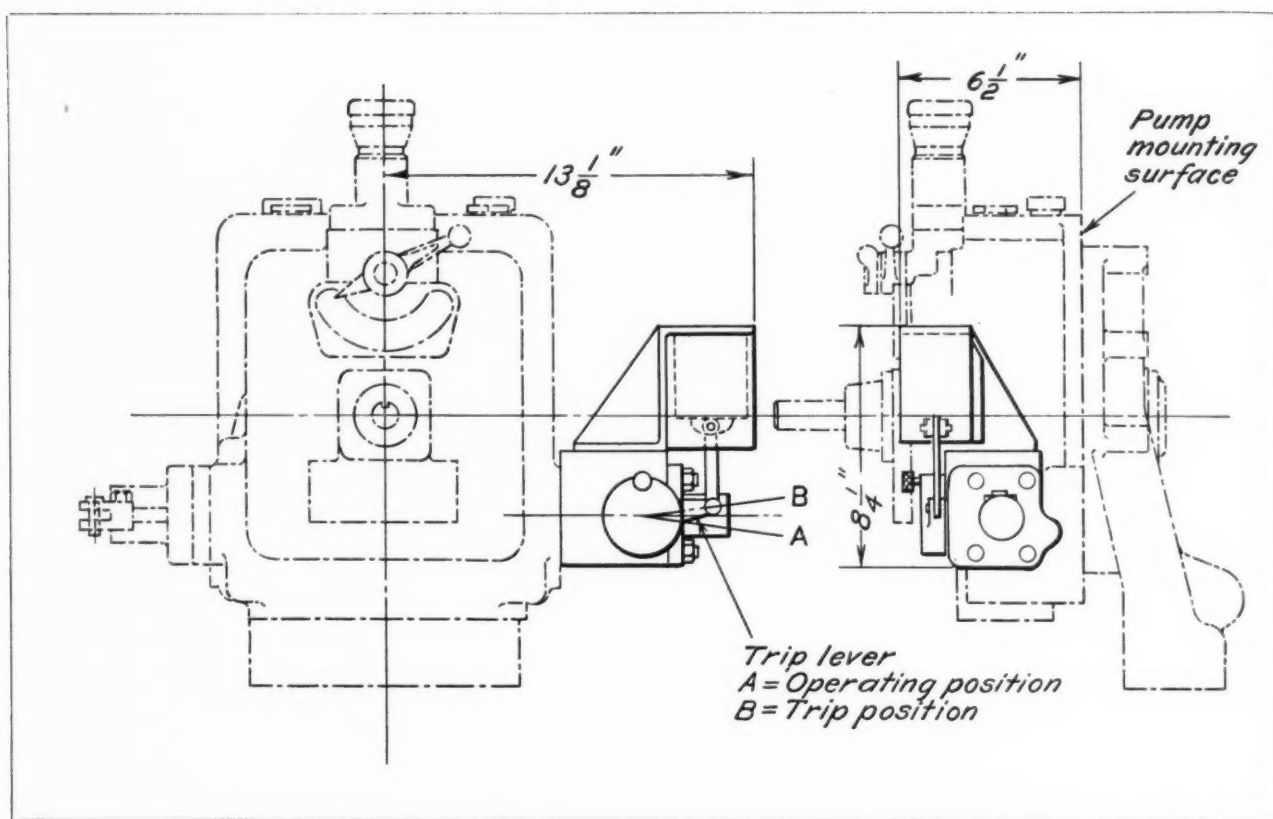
Oilgear Feed-pump Unit with Electric Delayed Reverse Attachment
